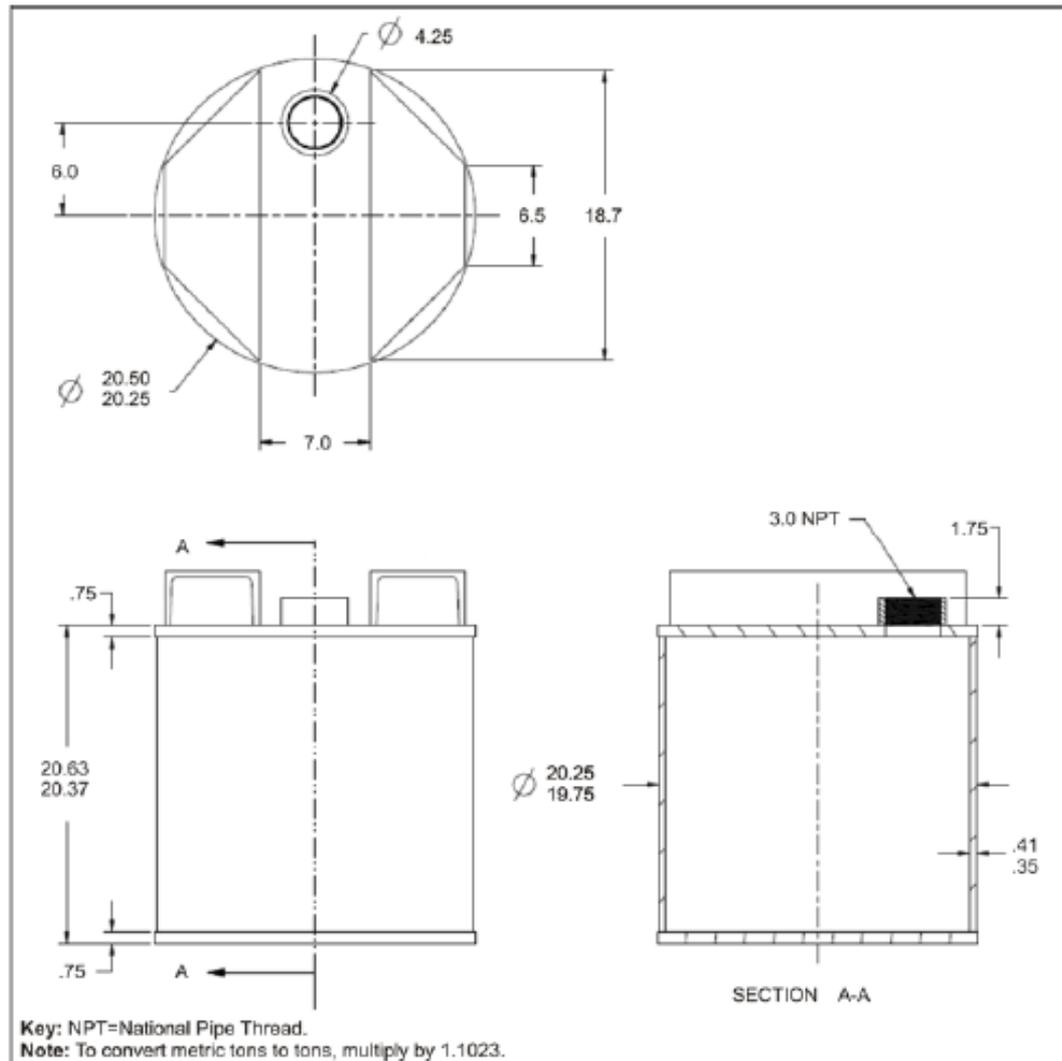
Dimensions of a Typical 1-Metric-Ton Container (inches)
